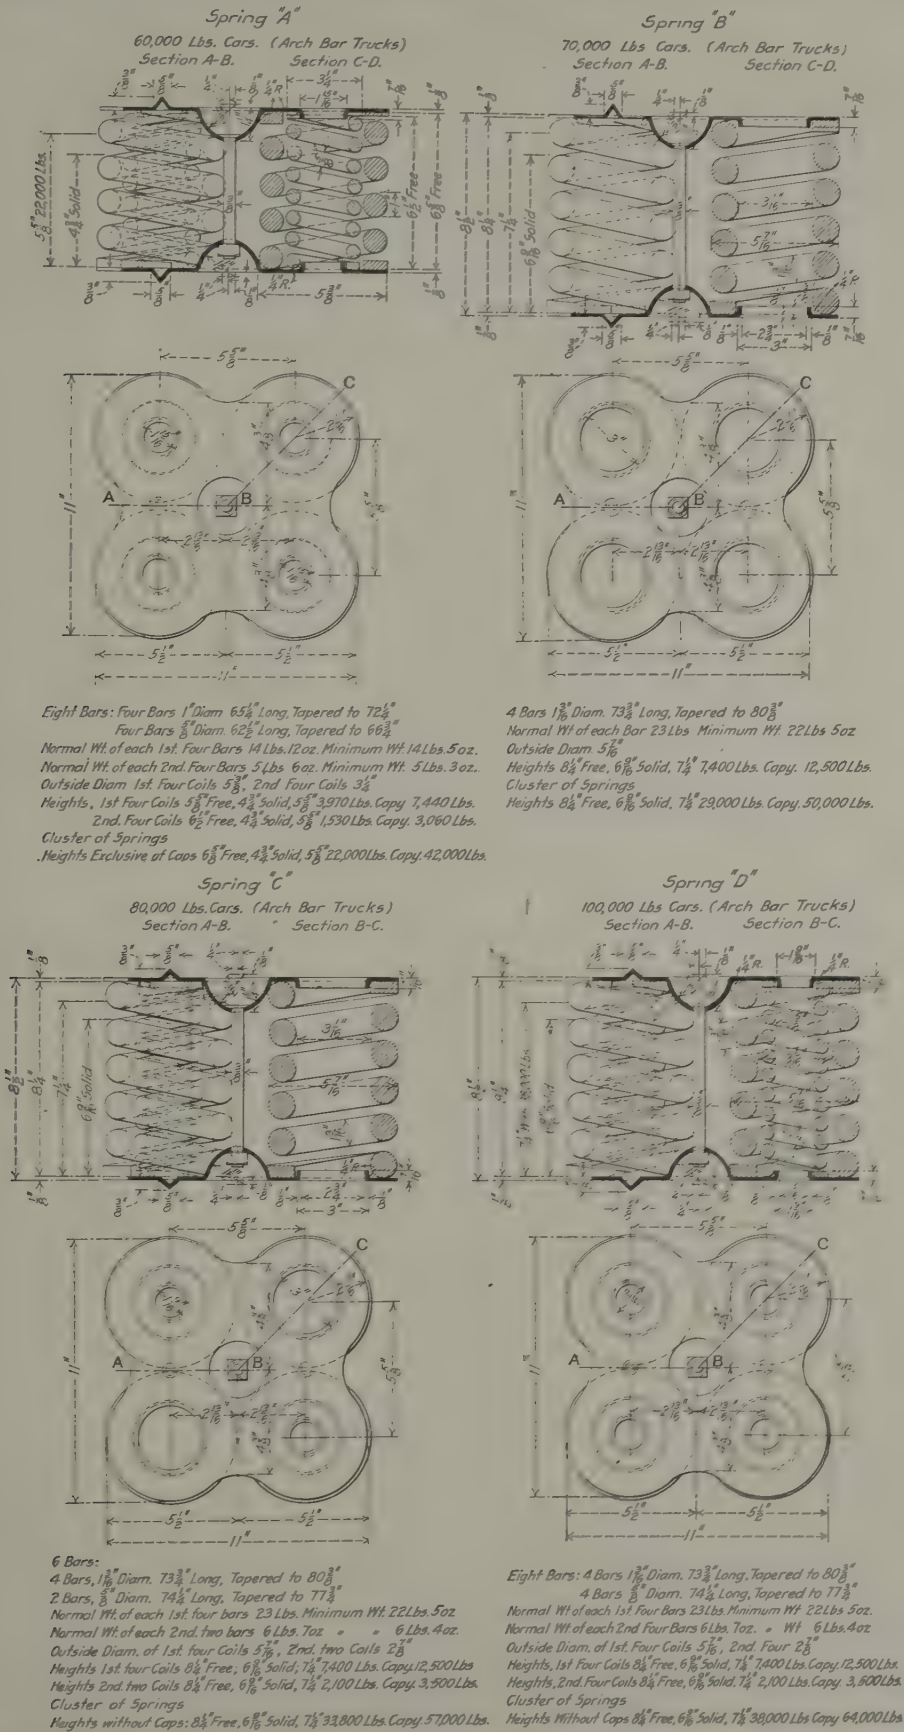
M. C. B. Standard Springs and Spring Caps for Freight Car Trucks. (M. C. B. Sheet 31.)
